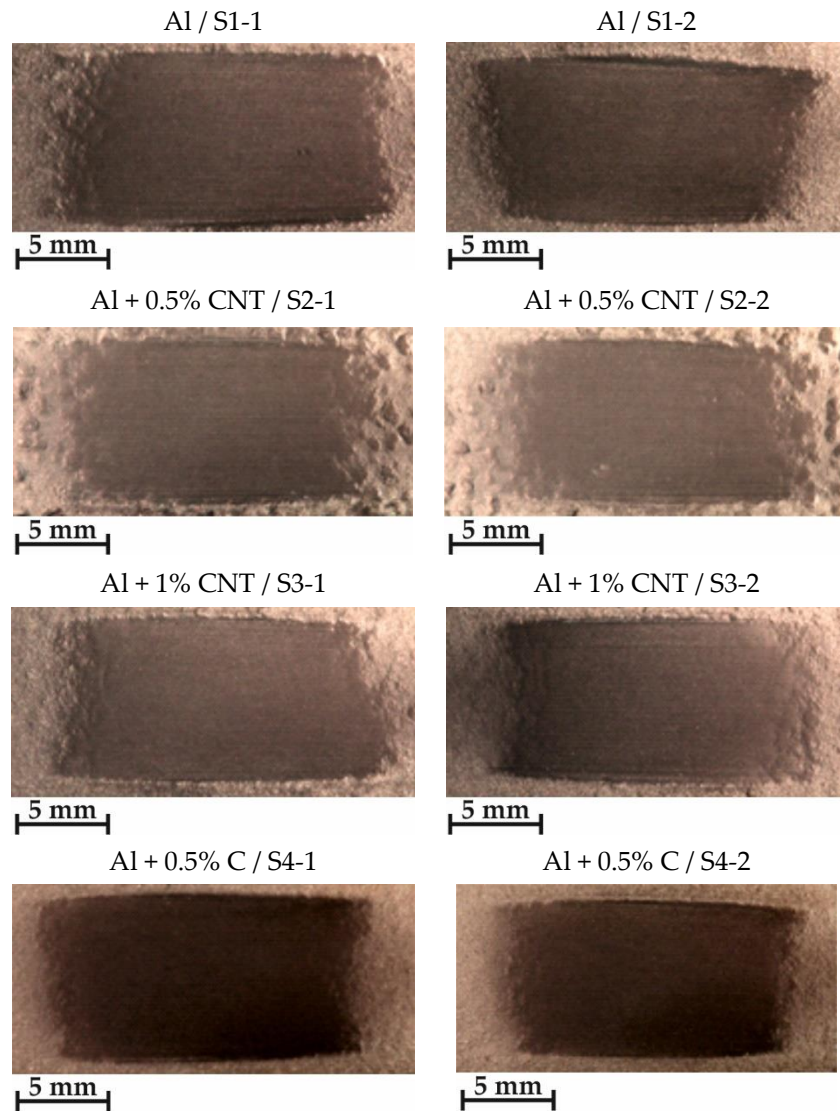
The surfaces of flame-sprayed aluminum and aluminum with carbon material coatings after wear resistance metal-mineral tests.
